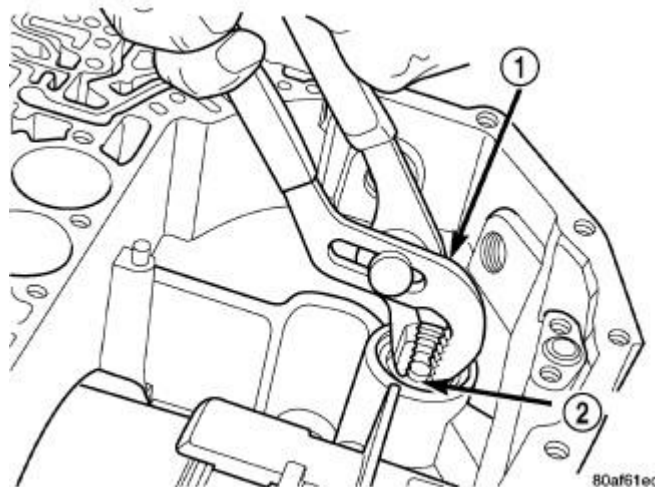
Remove/Install Low/Reverse Accumulator Plug
